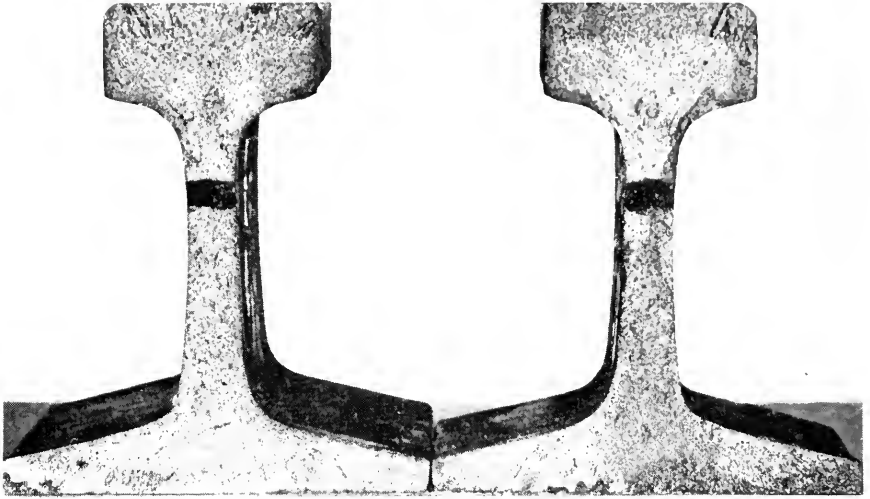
(Investigation 136-22)—Fractured faces of a failed electric flash butt welded rail joint. The black area in the web is an entrapment that was introduced during the welding process.
